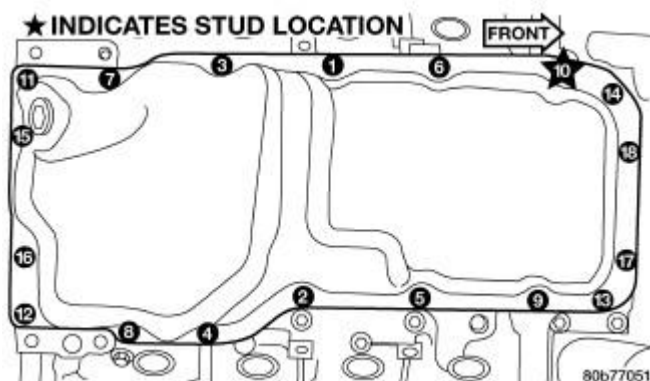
Oil Pan Bolt Removal/Tightening Sequence
